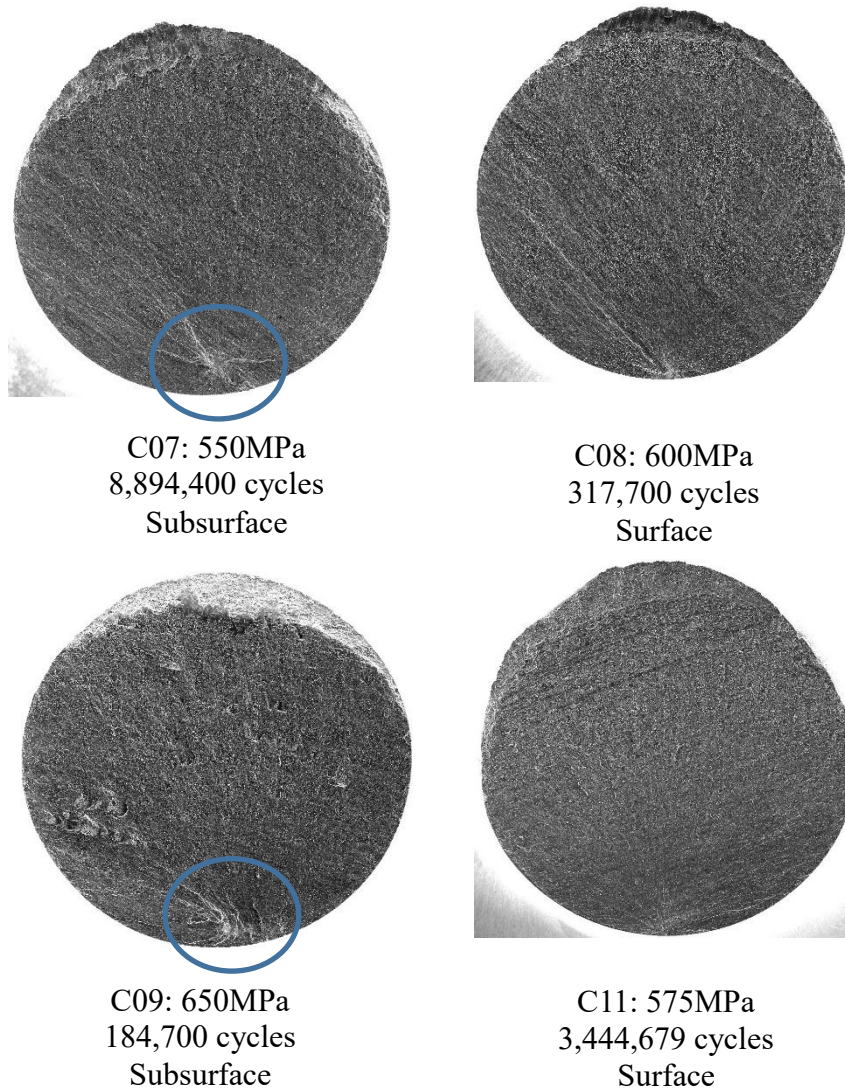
Fracture surfaces of the HCF axial test pieces.
